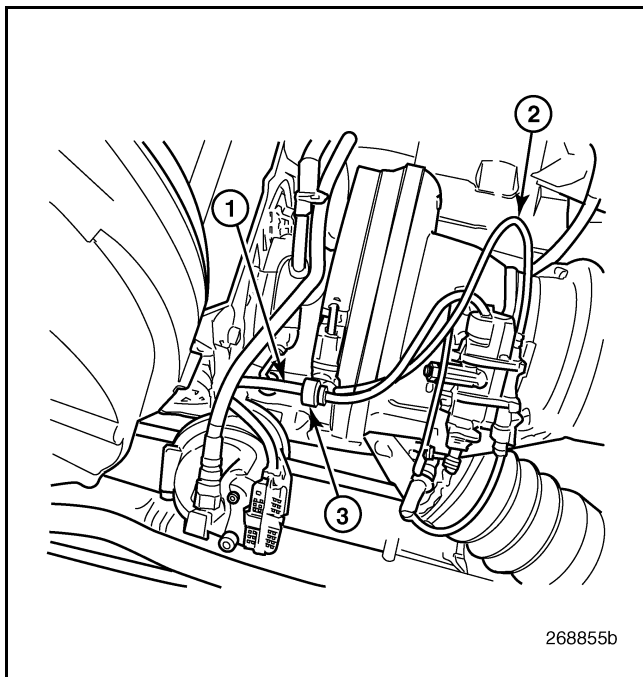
Vane Position and Wheel Speed Sensor Harness Routing
